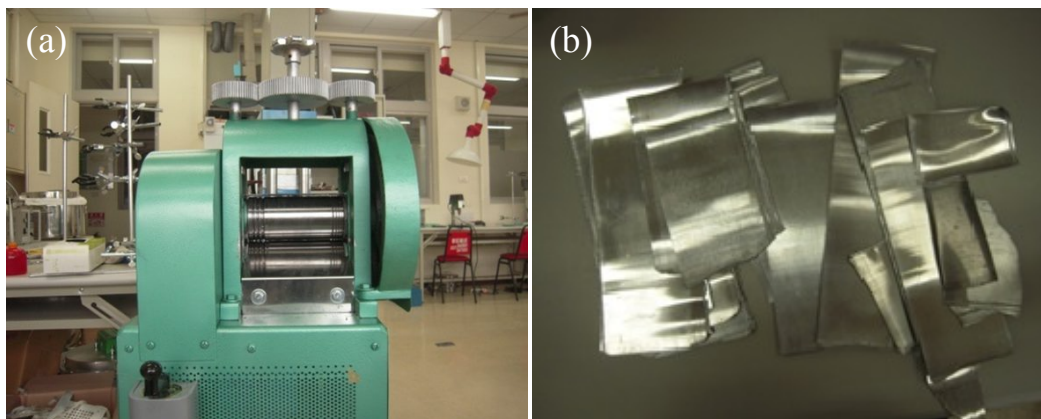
The Al foil was rolled form Al bulk by a rolling machine; (a) rolling machine, (b) Al foil.
